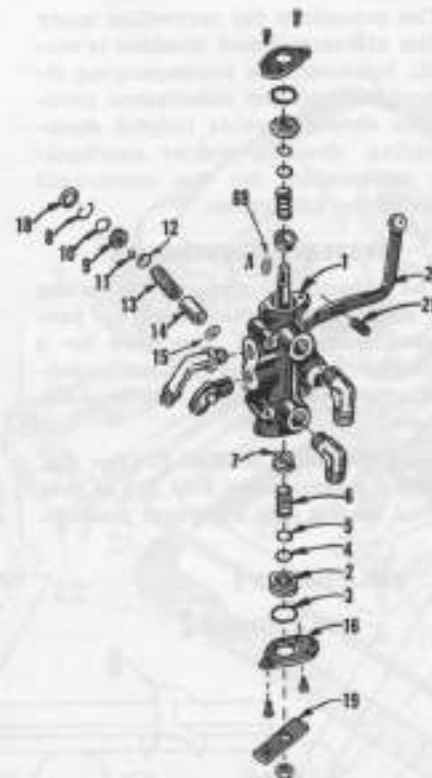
Exploded view of typical control valve as used on models without a mounted "Depth-O-Matic" cylinder.
